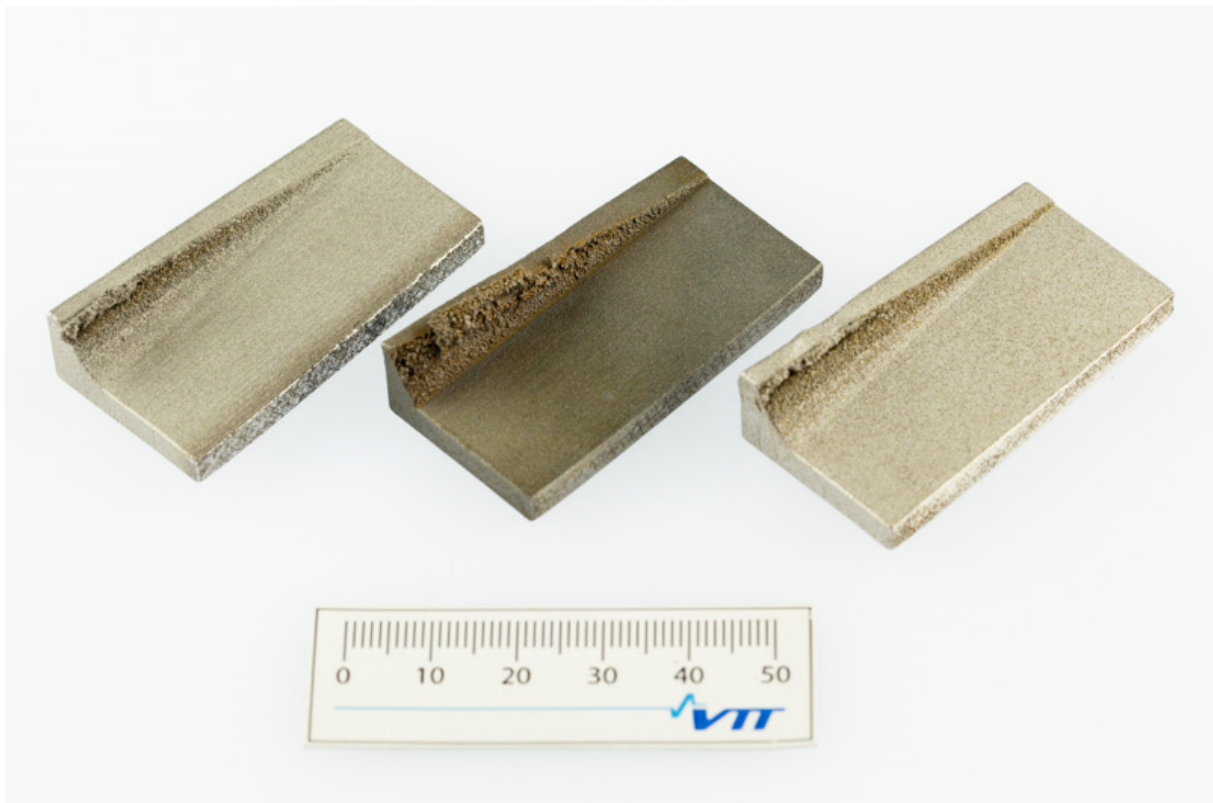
The overhang test pieces with and without fillet printed in H13 (middle) and 316L.
